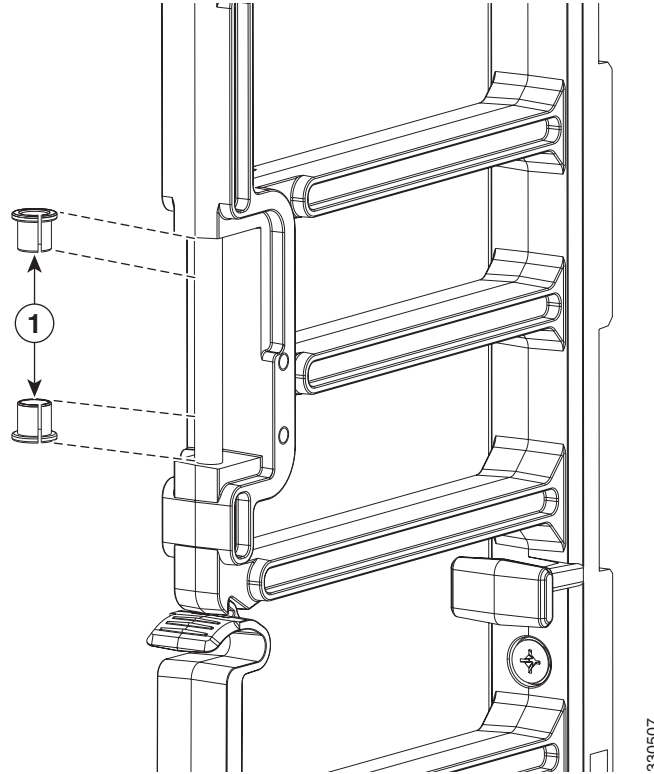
Removing the Door Stop from the Right Cable Management Frame
